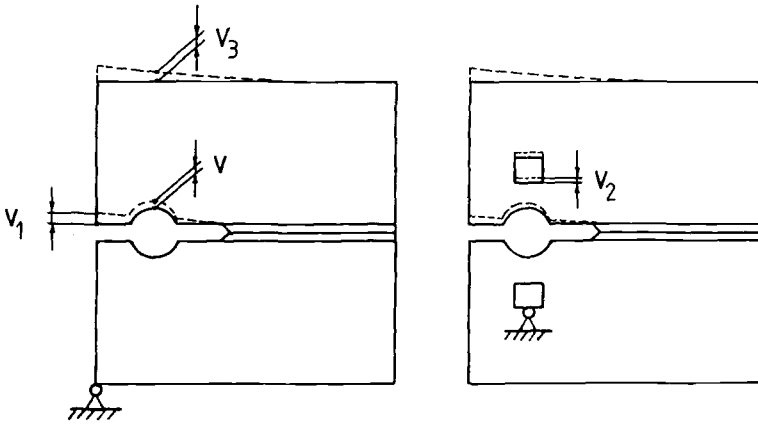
Side view of the compact crack arrest specimen with indicated positions for possible displacement measurements.
